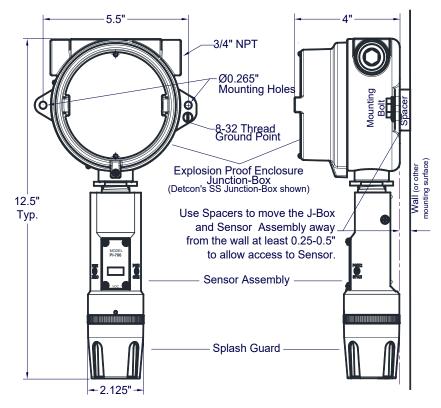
Outline and Mounting Dimensions (Stainless Steel Junction Box)
